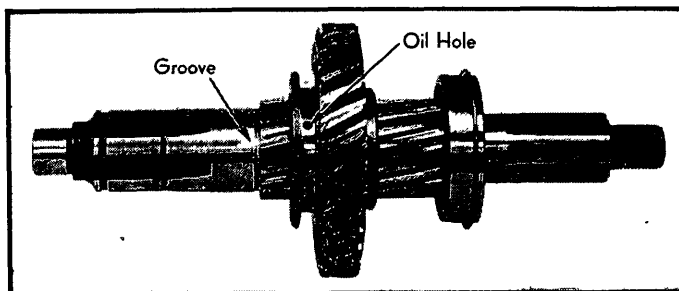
Showing how oil holes in low and reverse gear should line up with mainshaft grooves, 1941-52
